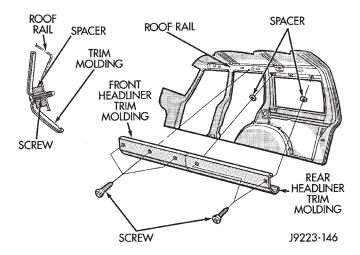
Upper Trim Moulding—4-Door XJ Vehicles
